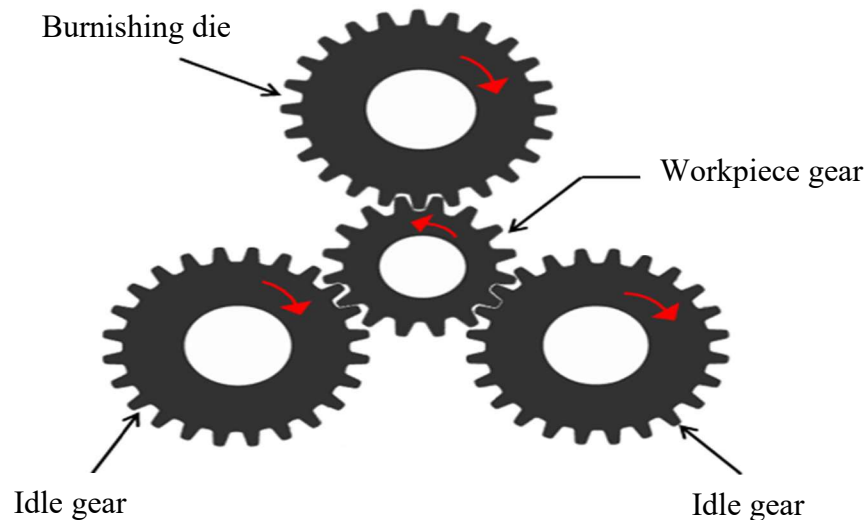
Schematics diagram of gear burnishing [6,8]
